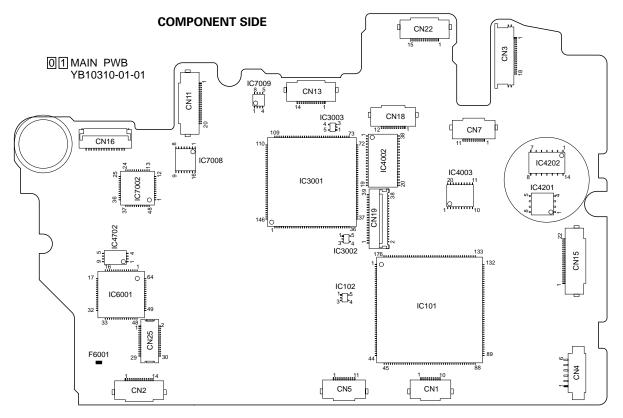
FUSE location for MAIN board assembly (COMPONENT SIDE)
